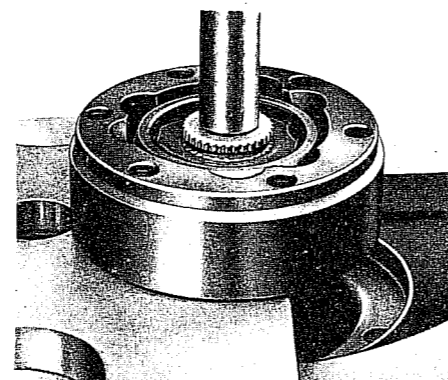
Pressing the drive shaft out of the ball hub - D/J axle.
